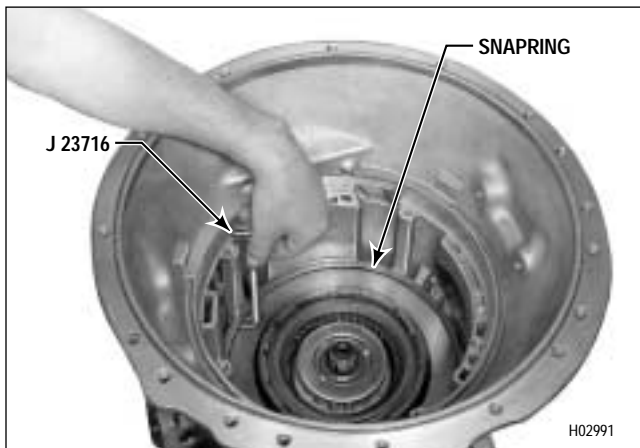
Checking Third Clutch Running Clearance (Models Without Retarder)
